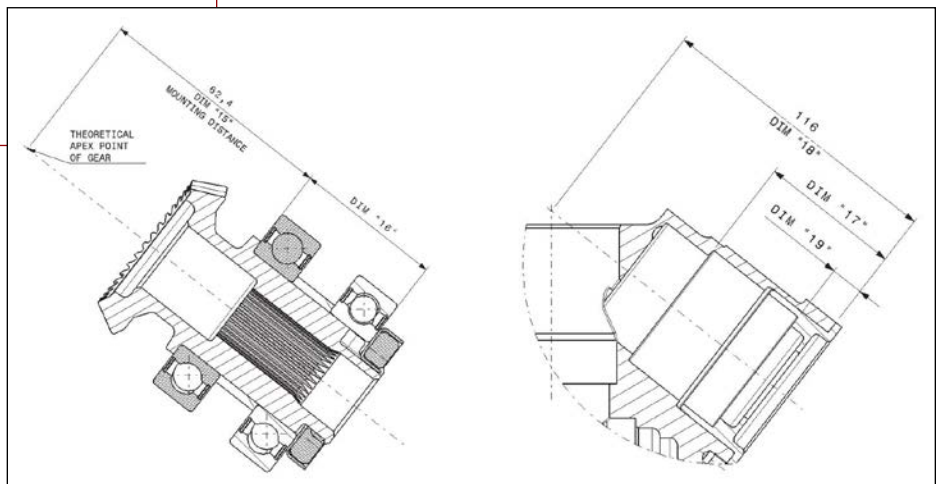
Bevel gear assembly and intersecting bores inside housing.
